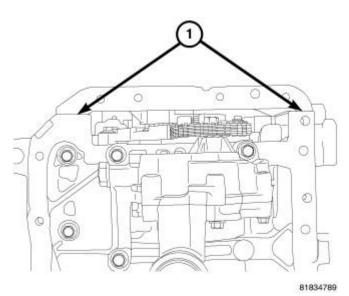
Oil Cooler Adapter Assembly Courtesy of CHRYSLER GROUP, LLC
